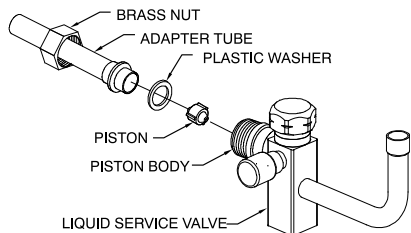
Liquid Service Valve with Heating Piston and Adapter Tube
